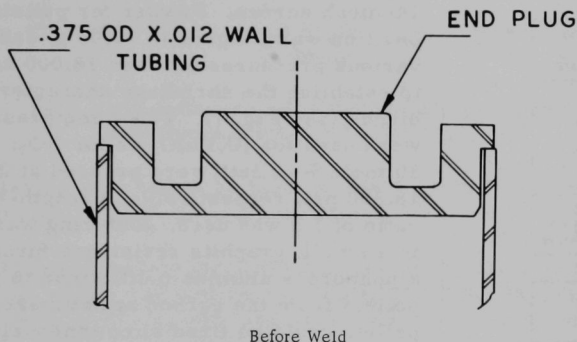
ZPPR Oxide-rod Weld Configuration,
